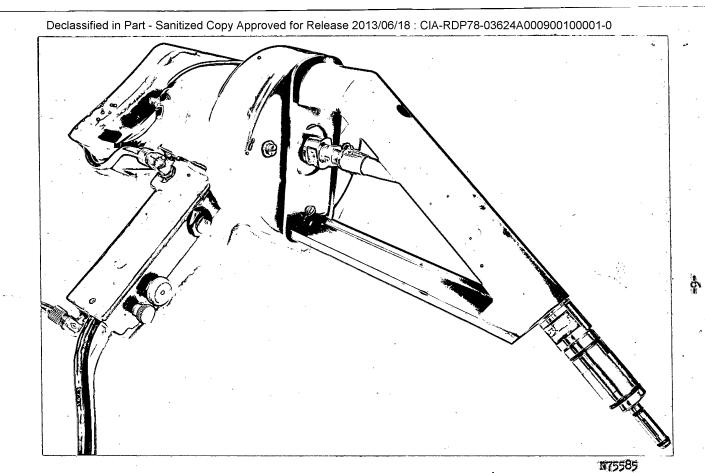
Alternate Version of Experimental Corner-Drilling Attachment, Joined to Drilling Unit With Two Screws
